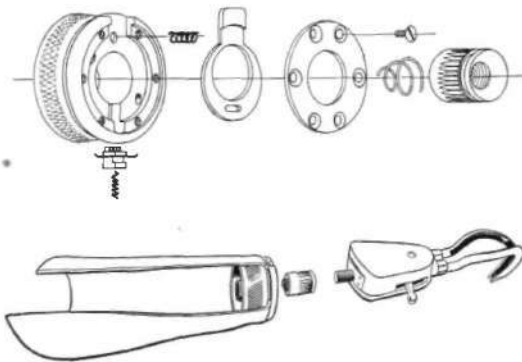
Hosmer F-M wrist unit, with exploded view showing arrangement of parts.
